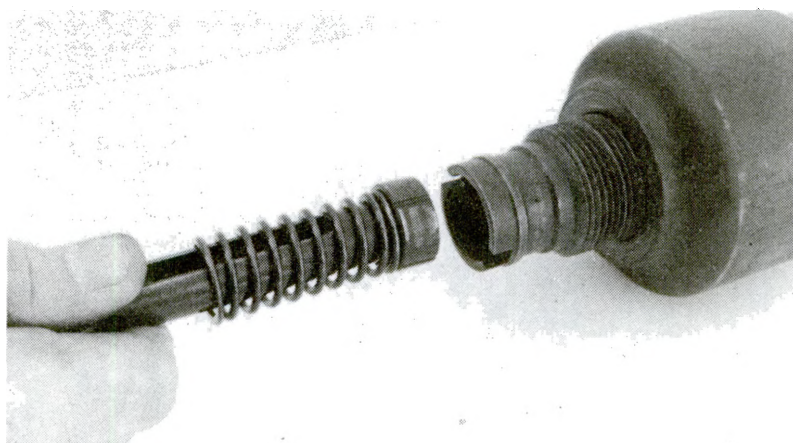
Removing firing pin striker, firing spring, and firing spring stop.
